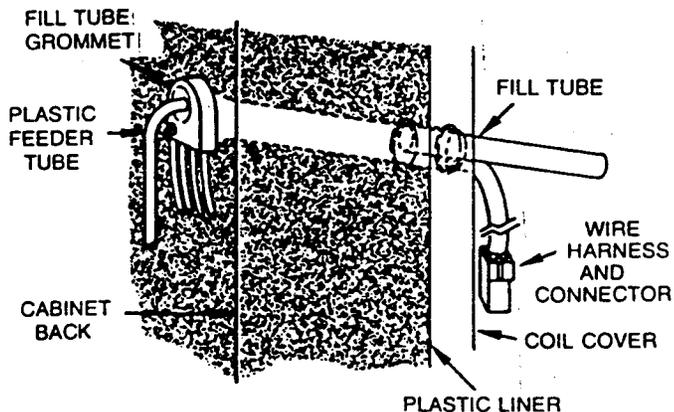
Cross-section view of fill tube and ice maker harness properly installed
